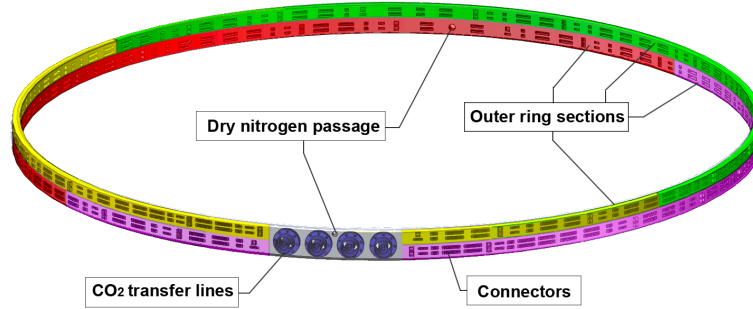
The outer ring assembly. The largest part of the hermetic vessel, with 2 m in diameter, it contains the service feedthroughs for cables, CO₂ transfer lines, and dry N₂ pipes. The outer ring is divided into sections, associated with each half-disc. The sections belonging to different half-discs are shown with different colors, as well as a small section with connections of the CO₂ transfer lines.
